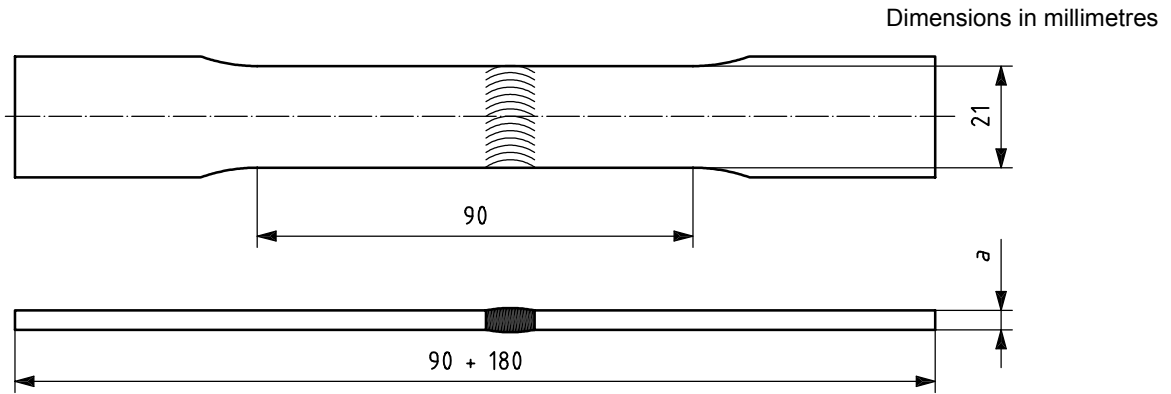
Test sample for tensile test perpendicular to the weld
